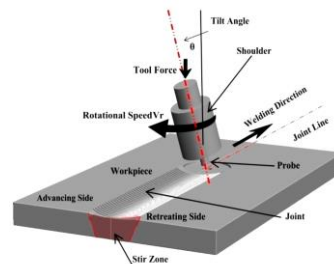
Schematic Diagram of the Friction Stir Welding (FSW) Process[12]
